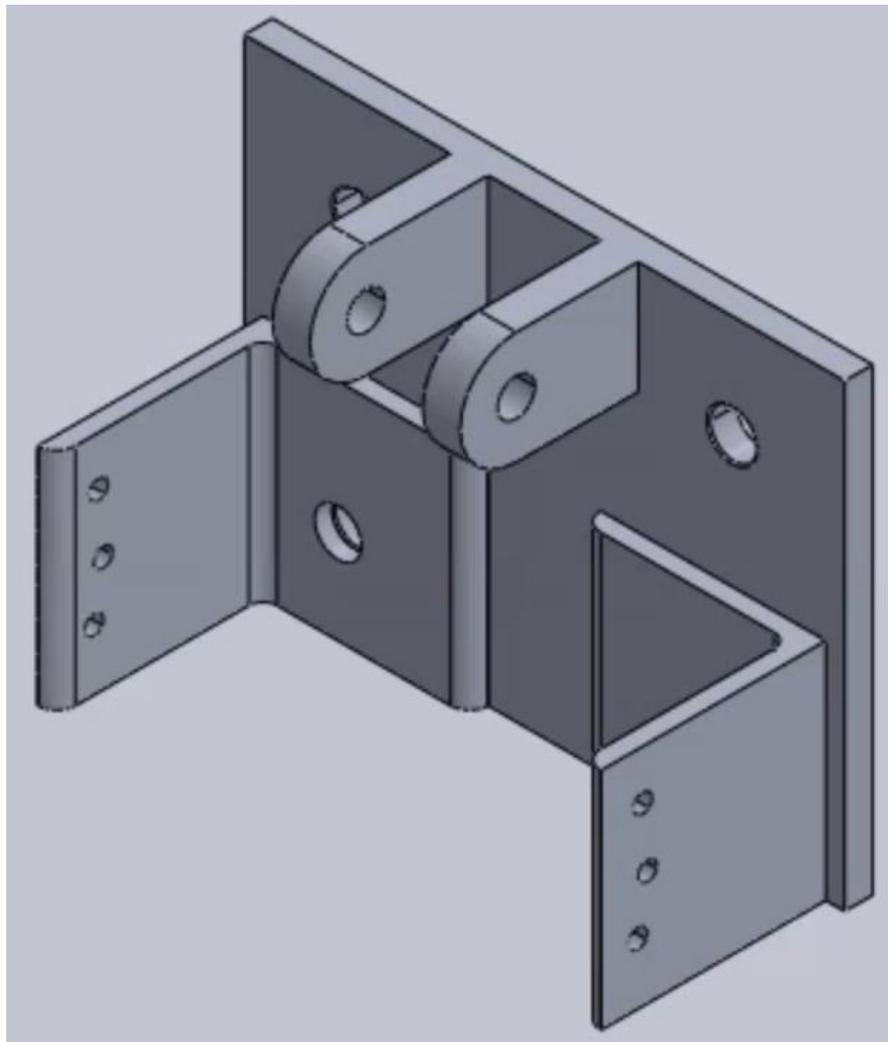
Half of the Trim Angle Adjuster. The half that bolts onto the hull.
